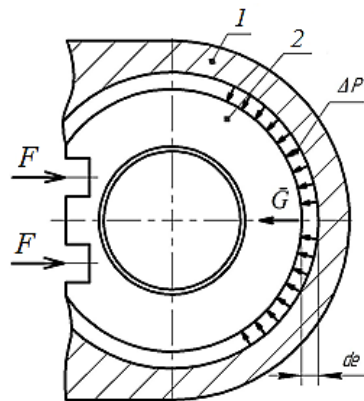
Fluid leakage design scheme: 1 – pump housing; 2 – sleeve;
